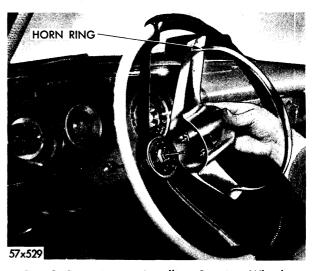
Removing or Installing Steering Wheel Horn Ring
